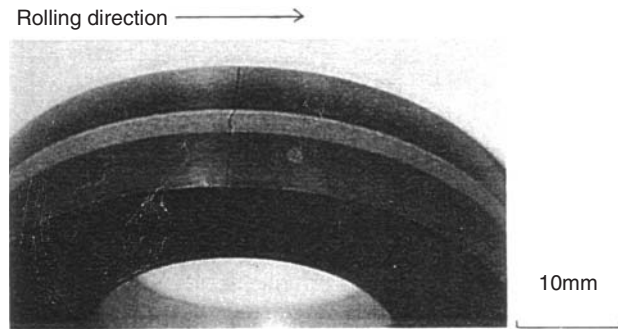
Fracture of ring specimen tested at $P_{max}=3GPa^{11)}$
